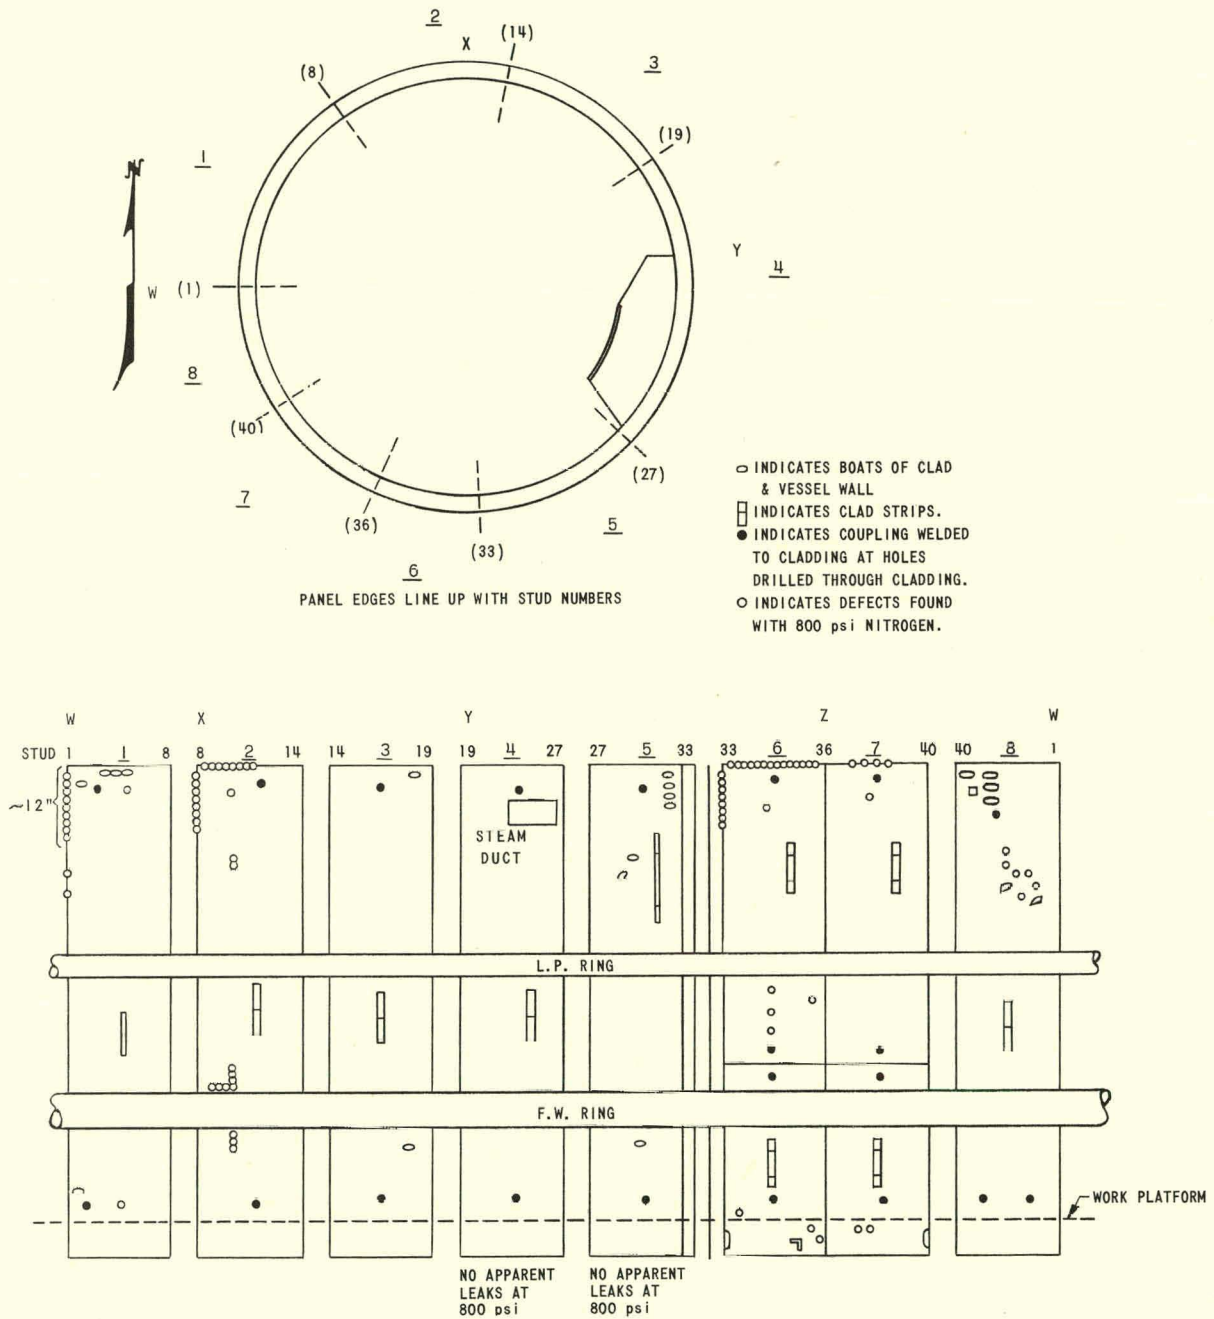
Pictorial summary of EBWR vessel inspection, showing areas of vessel material exposed by removal of boat and strip specimens
